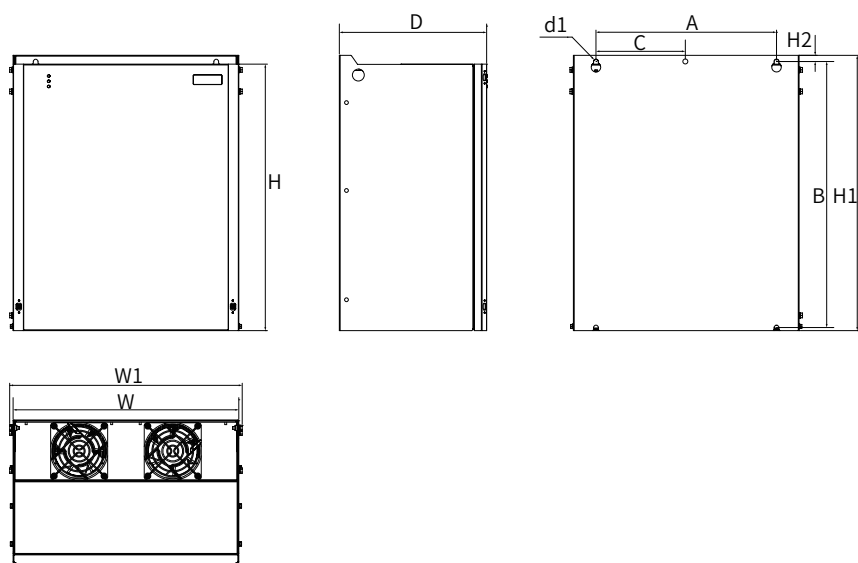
Dimensions of backplate mounting for CP700-4T110-H to CP700-4T132-H models
